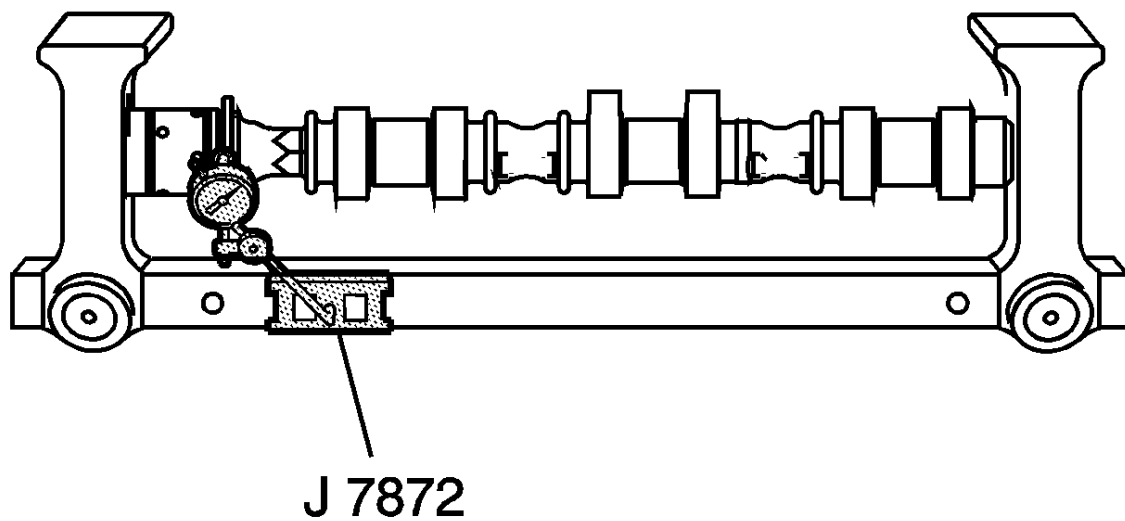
Measuring Camshaft Thrust Wall Surface For Runout
